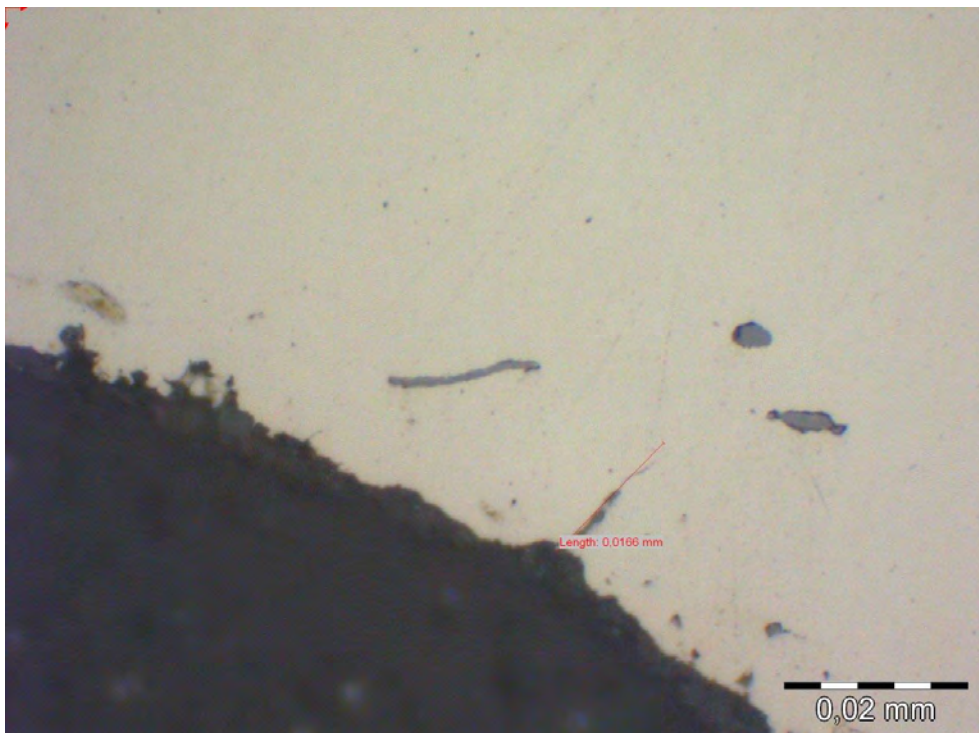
Cut five in crack at segment C, third ridge on barrel no. 14389
